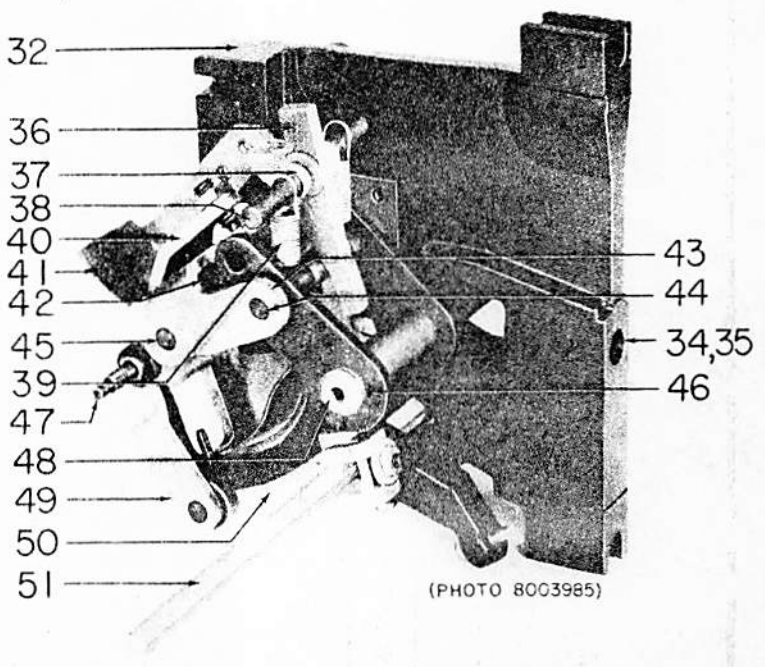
Operating mechanism linkage for Type AK-1-15 air circuit breaker (right side frame removed)
